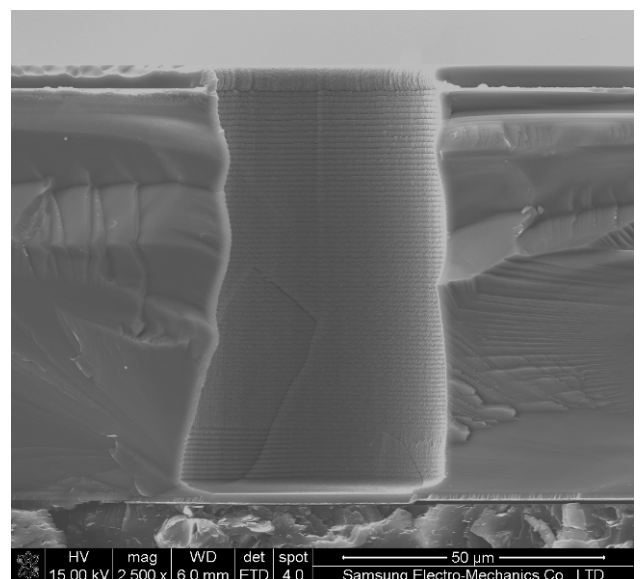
Cross-sectional view of via hole with fillet structure at bottom corner
